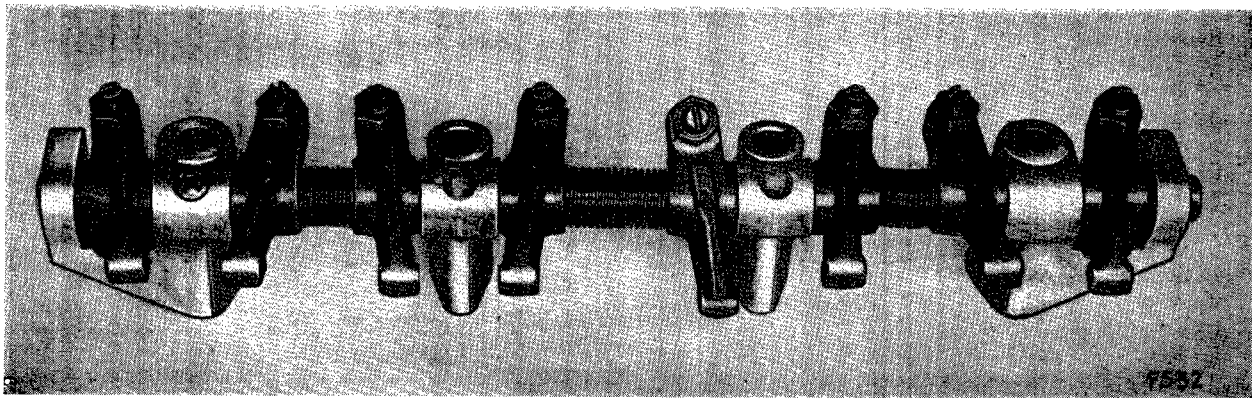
Rocker gear (13/60 and Spitfire Mk. 3)
